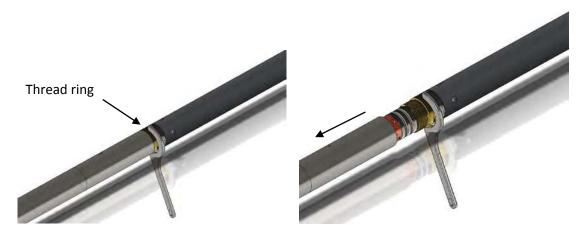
Unscrewing the thread ring and removing the bottom sub
